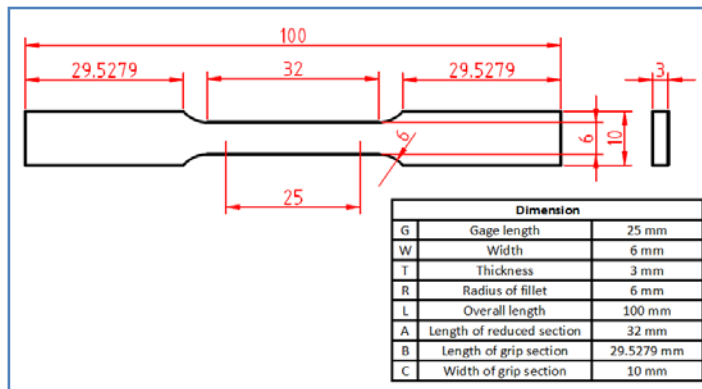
Dimensions of tensile testing specimen according to ASTM E8/E8M-11
